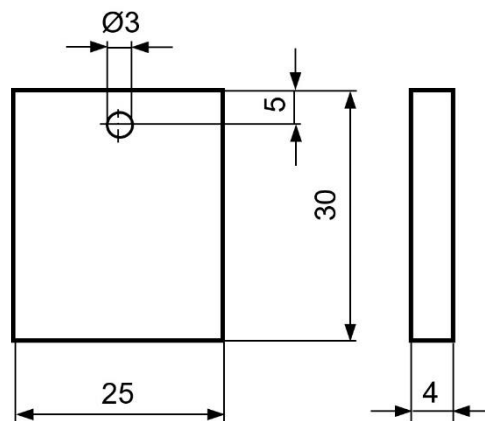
Shape and dimensions of the specimen for exposure immersion test
